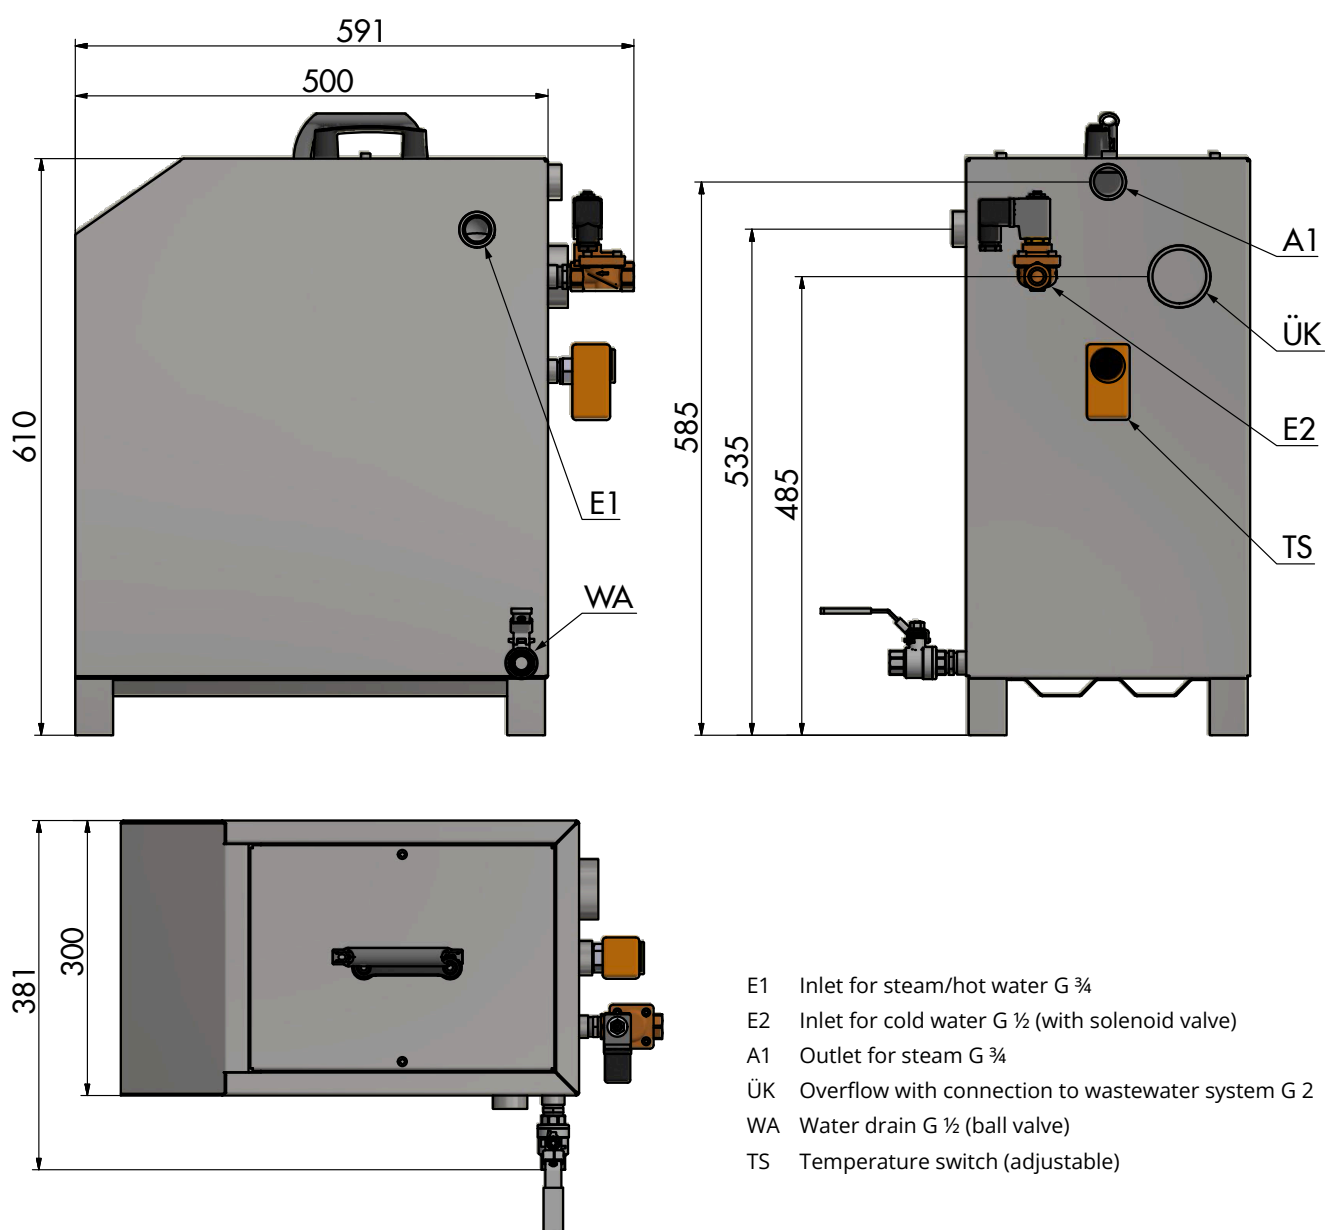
Dimensions and connections of the Type 7125 Mobile Blowdown Vessel · All dimensions in mm
